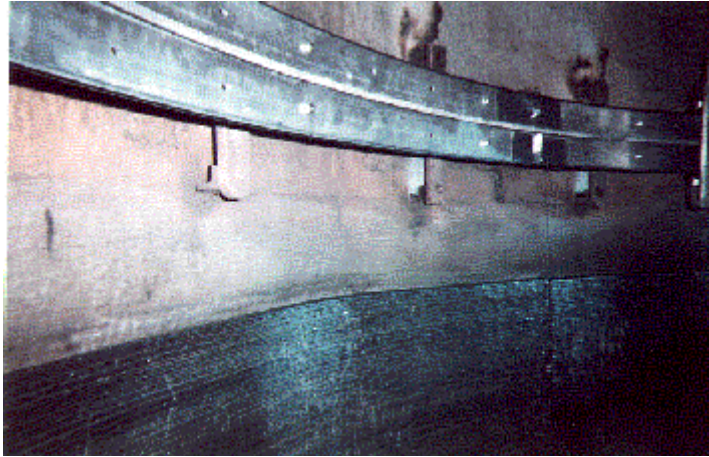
Type 317L overlay applied in a horizontal mode on the internal diameter of a crude distillation tower. The track used to guide the welding machine was still visible.
